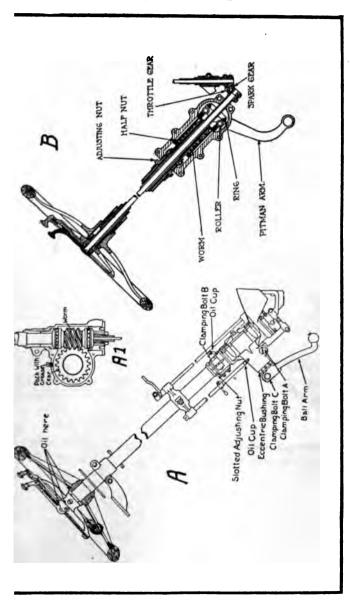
Outlining Construction of Typical Steering Gears. A.—Worm and Sector Type. B.—Screw and Nut Pattern.
